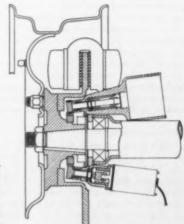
Installation of the anti-skid unit, and a D.C. generator for signalling road speed, on a rear wheel assembly of the car used for the braking tests
